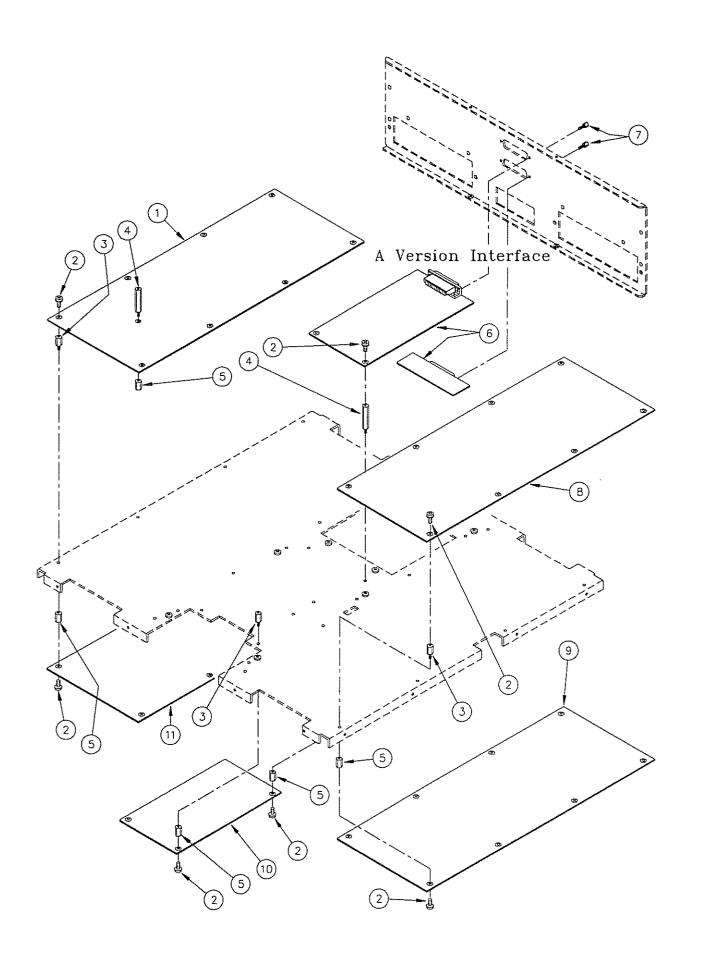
MAIN MODULE CIRCUIT BOARD ASSEMBLY
